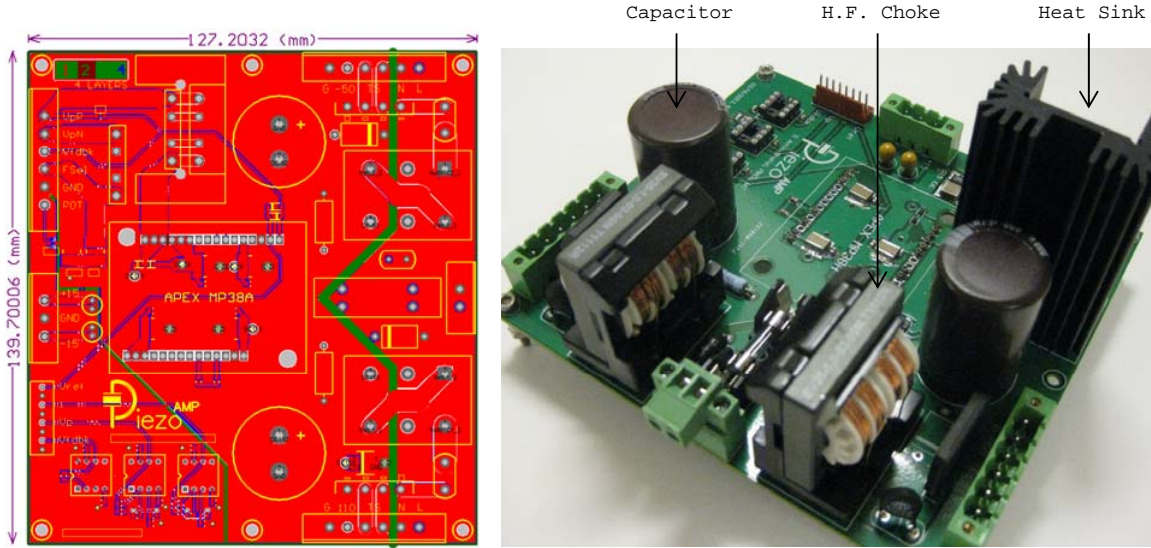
The amplifier's printed circuit board design (left) and manufactured circuit board (right).
